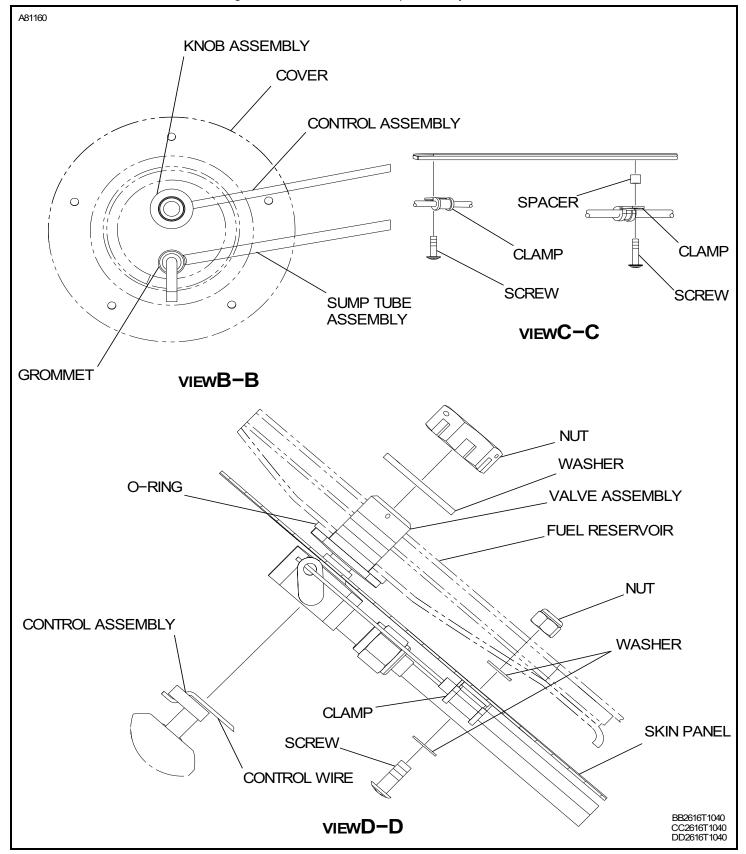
Sheet 2 : Fuel Sump Assembly Installation
